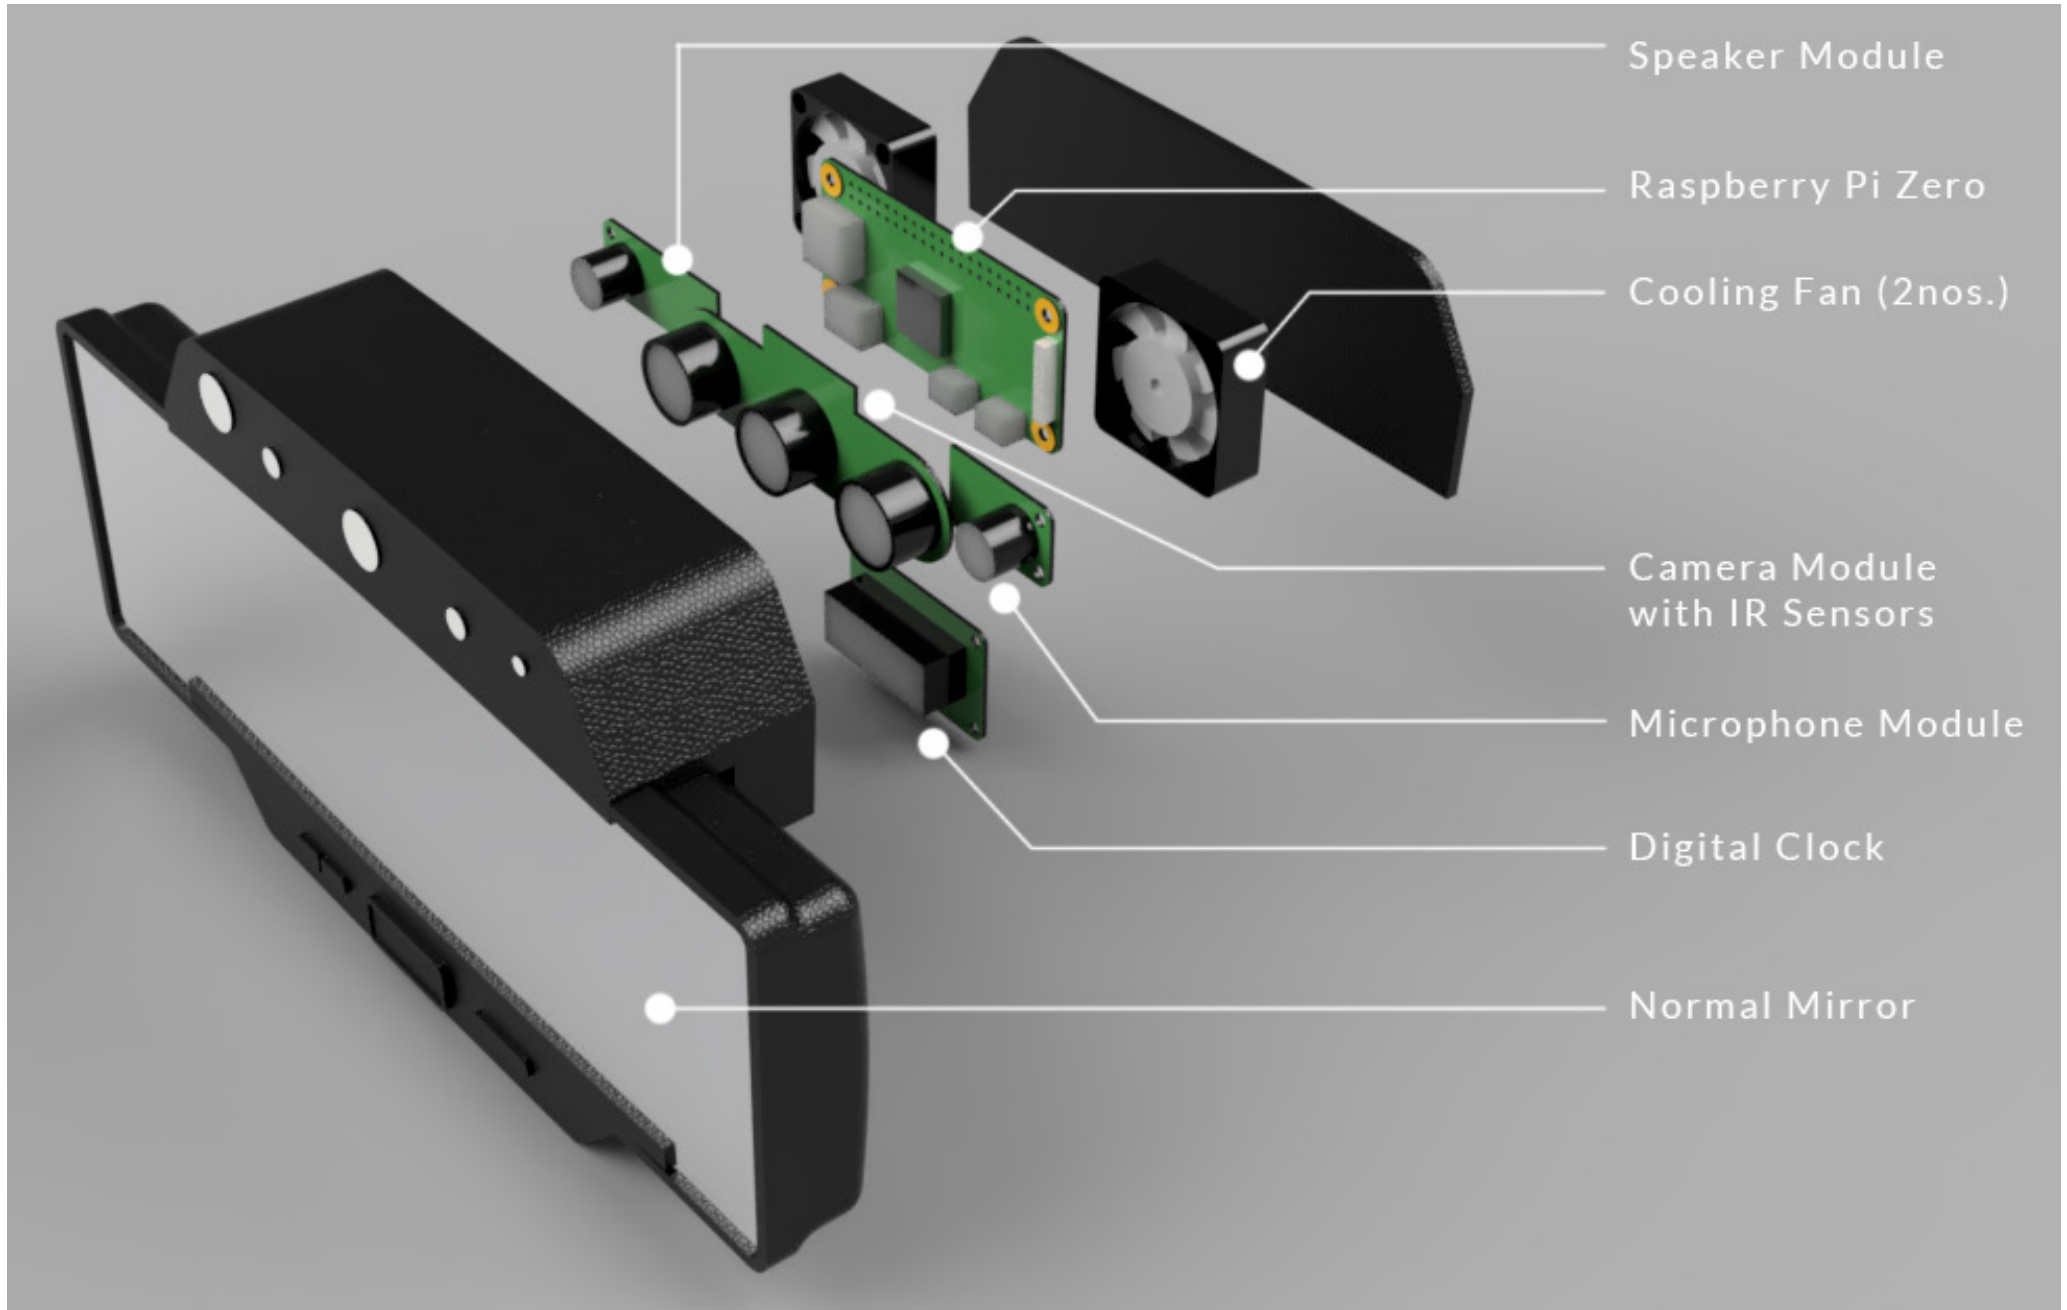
(c) - Exploded view of the Driver State Monitoring Device
